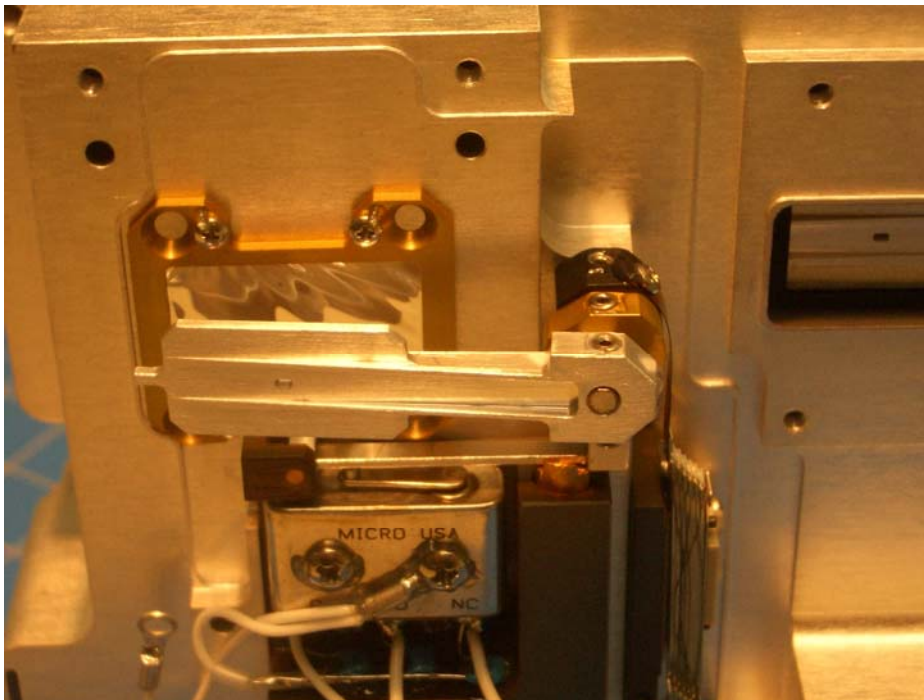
Deformed pivot shaft and outer attenuator (FRONT VIEW)
